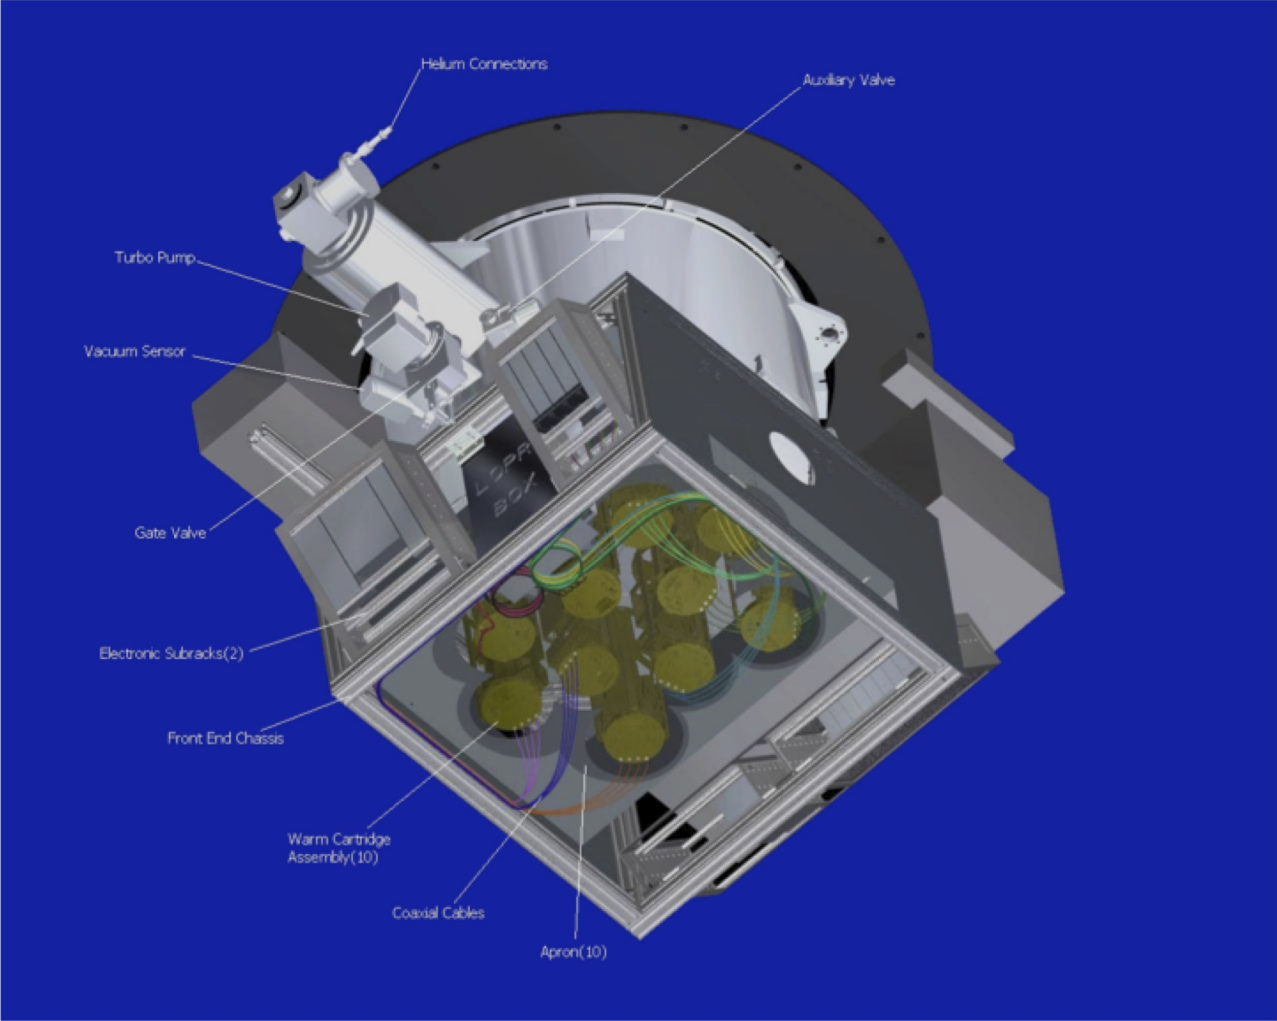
Bottom view of ALMA front end, showing WCAs.
